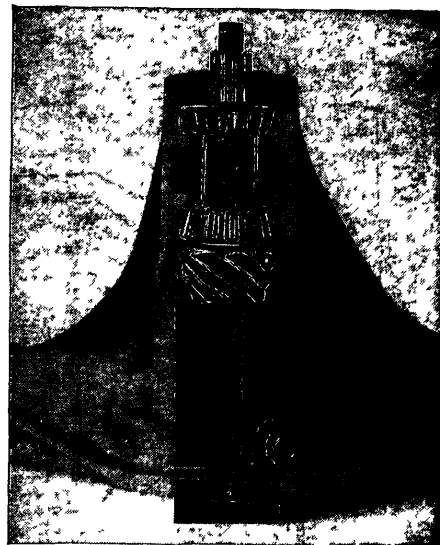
Supporting drive pinion with wood block while installing pinion flange. 1935-52
